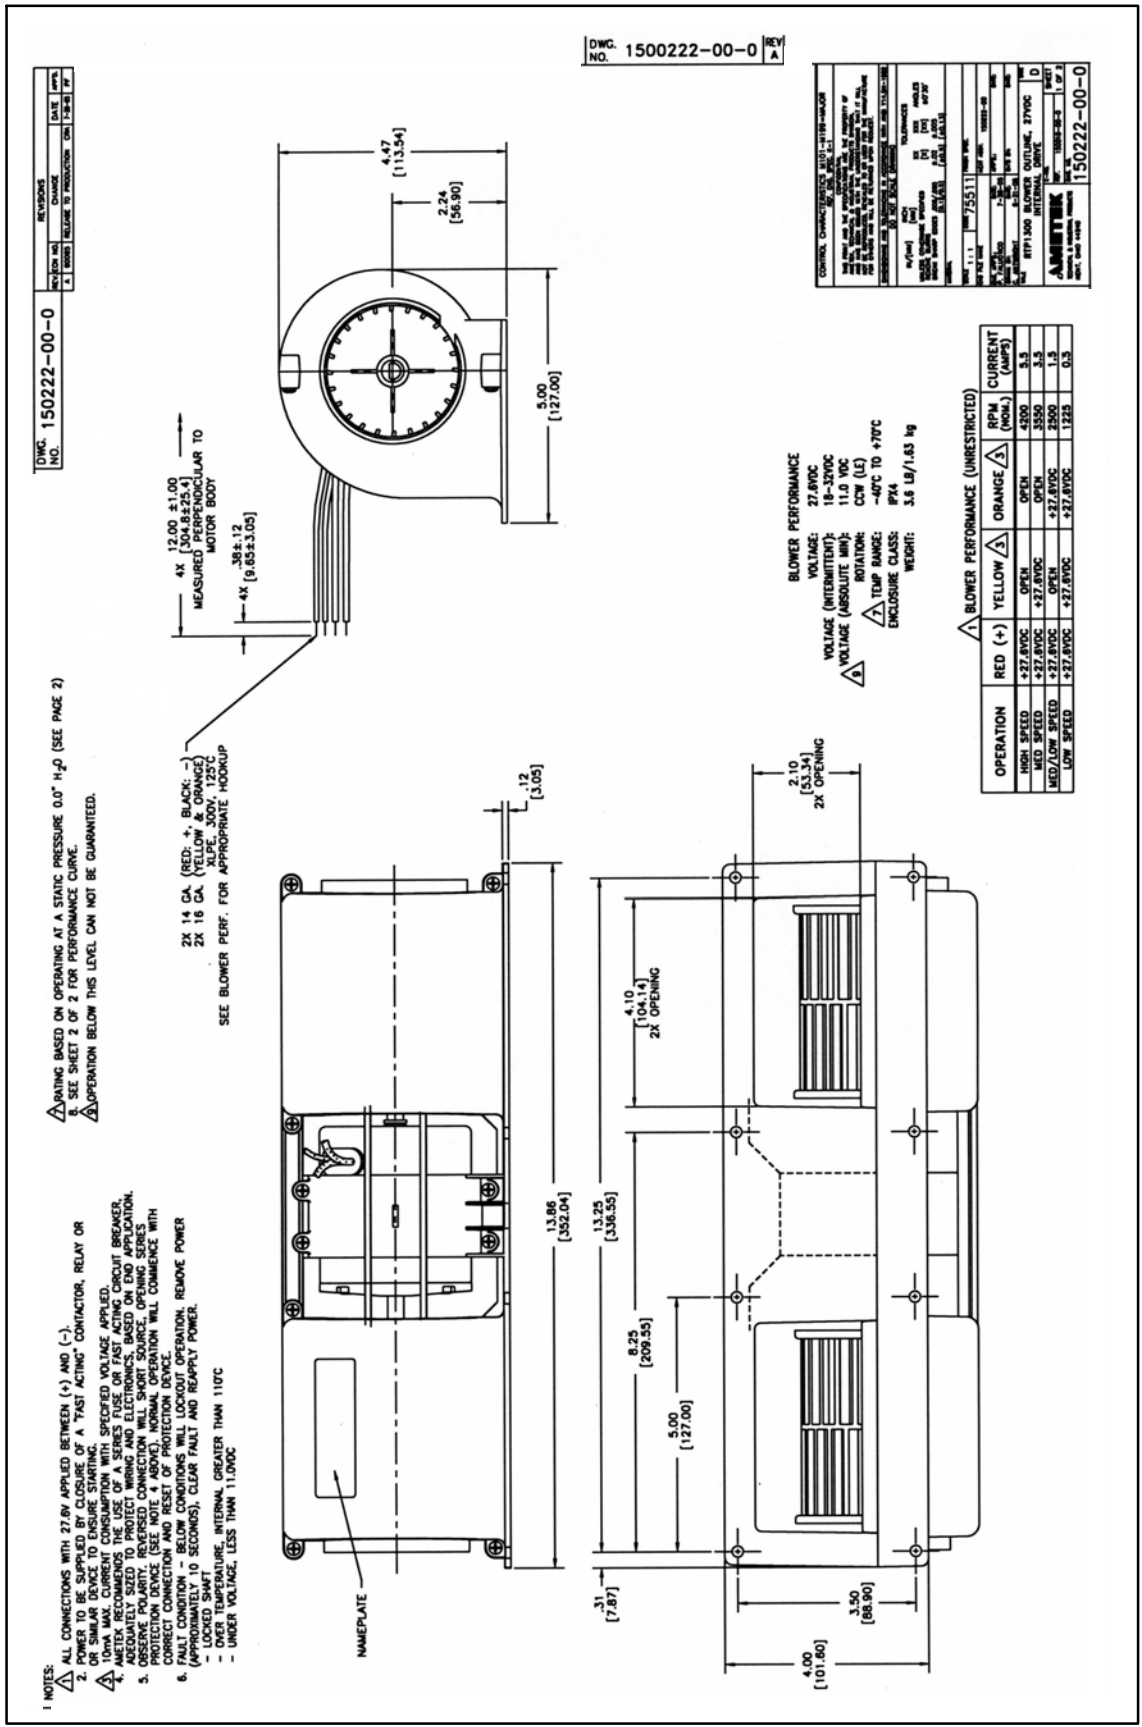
Specifications Outline Drawing for RTP1300 Blower 150222-00 (27.6 VDC Motor).
